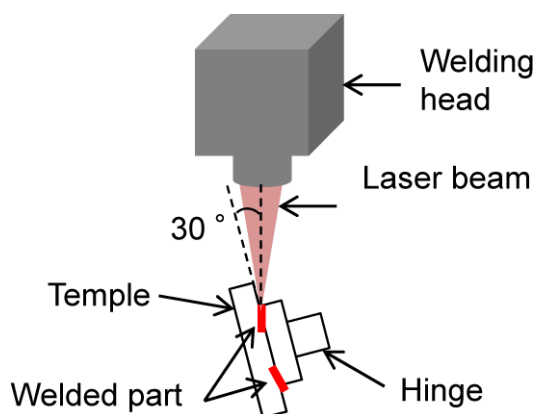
Welded parts of eyeglass frame.
